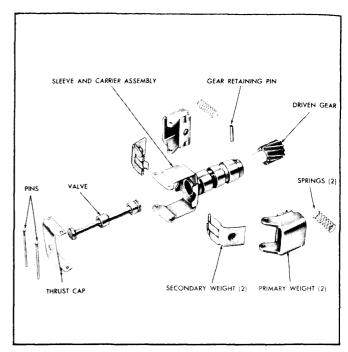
Governor Assembly - Exploded View (Typical)
